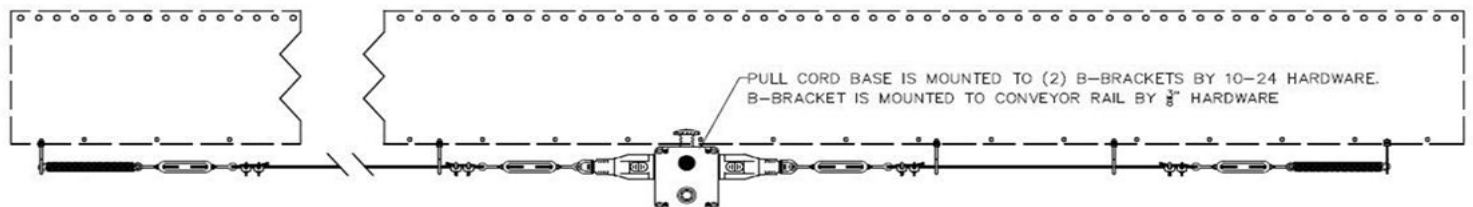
E-Stop Mechanical Parts - Callouts - Part 2
